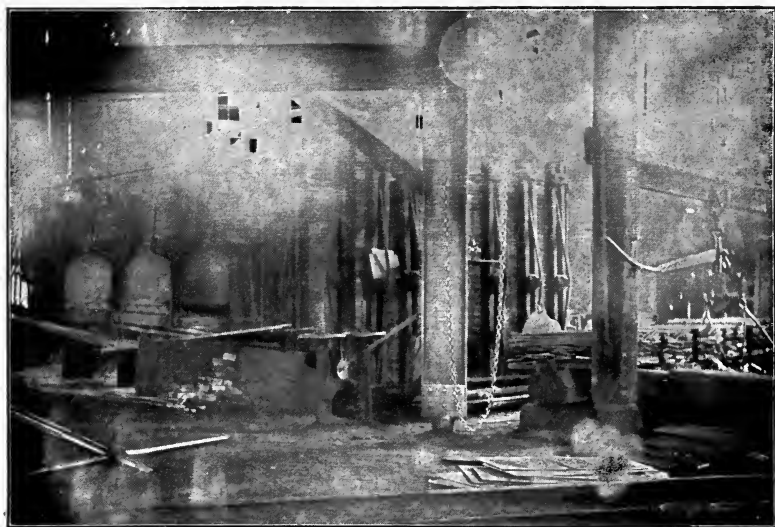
Re-heating Furnace used in Making Wrought Iron.
